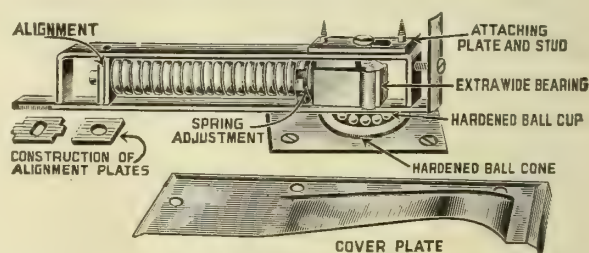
Side Plate Removed, Showing Working Parts of Hinge
